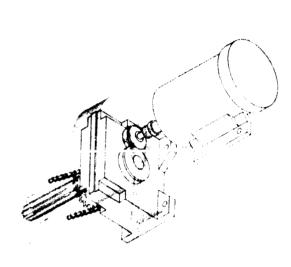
Large Saw Assembly: Frame, Carriage Drive, Motor and Gearbox
